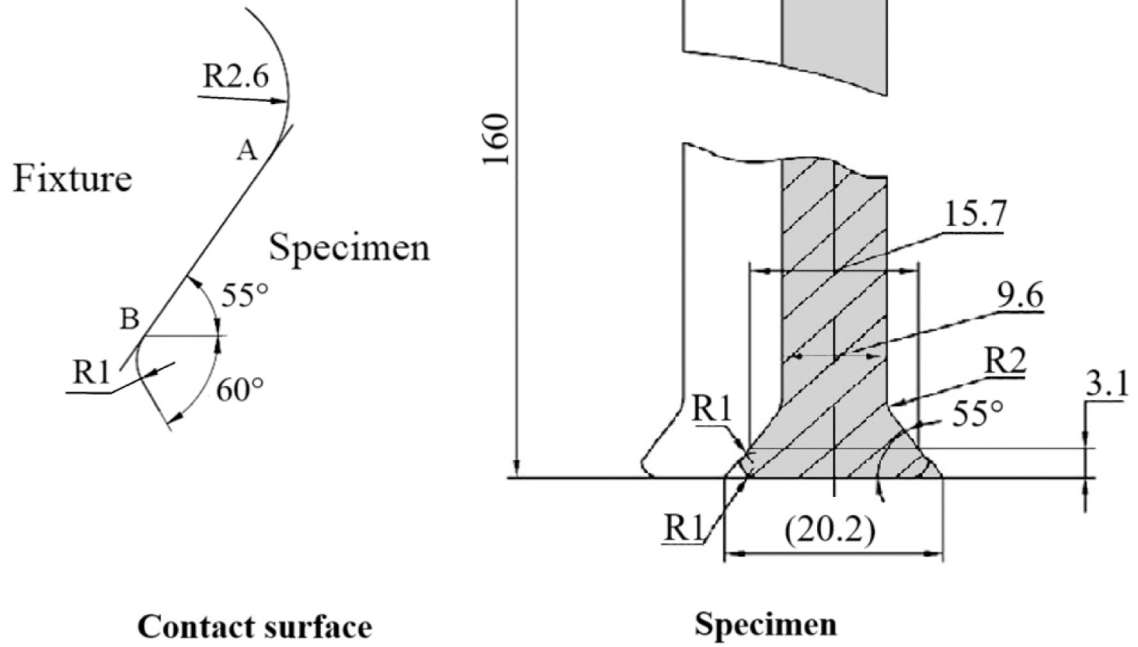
The geometric dimensions for the traditional dovetail joint [19].
